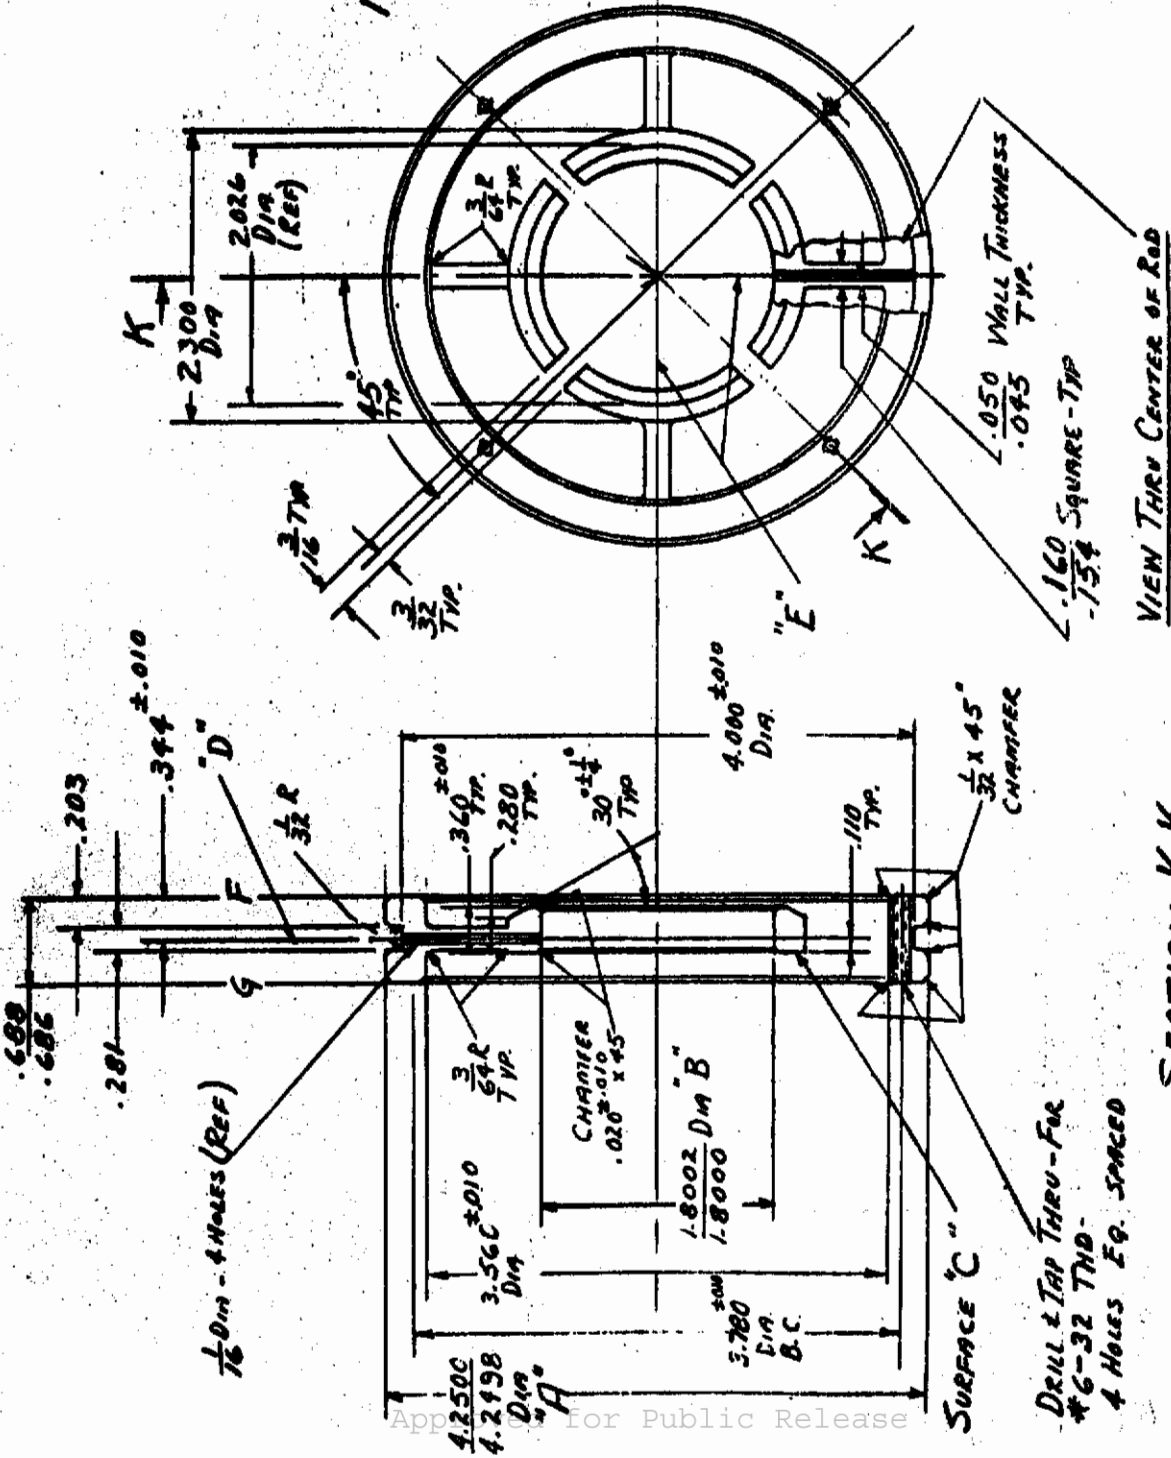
Assembly of Flexure Mounted Hybrid Pad Bearings
